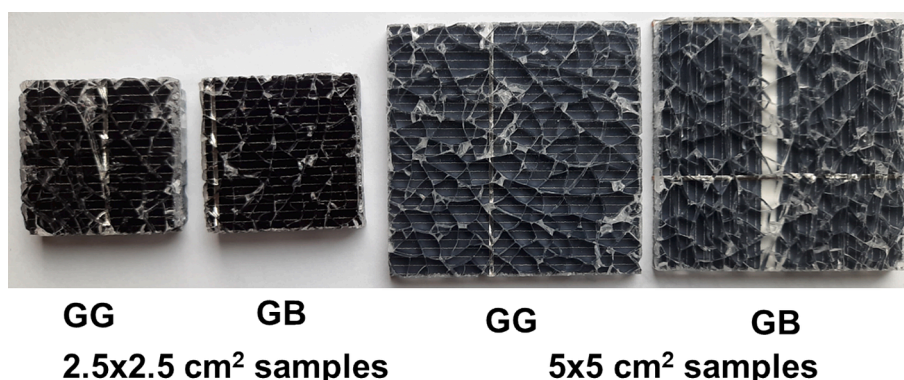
GG and GB panel samples after being cut into pieces using a high-pressure water jet. The cracks on the glass visible here appeared during the cutting process.
